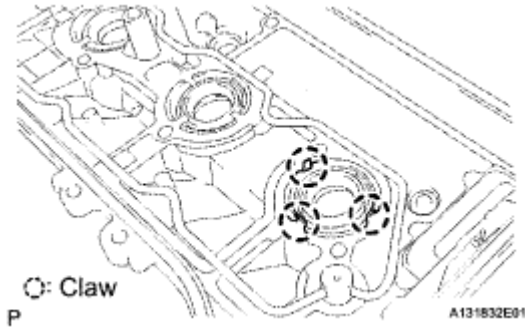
Identifying Claws Of Ventilation Baffle Plate
